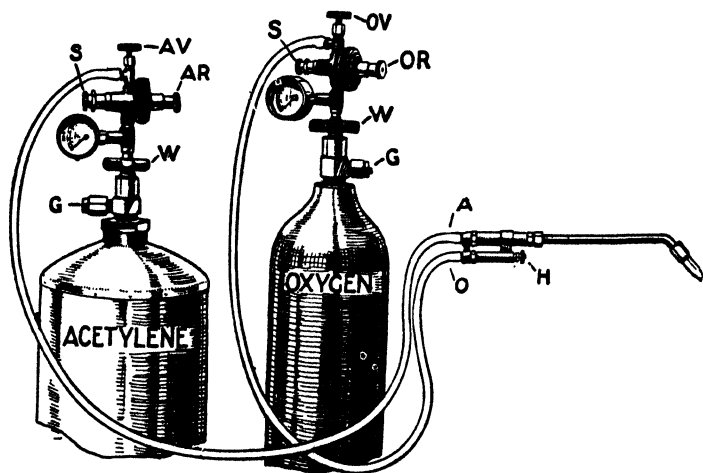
Dissolved Acetylene and Oxygen Cylinders, Fittings, Connections and Blowpipe for High-pressure Welding
